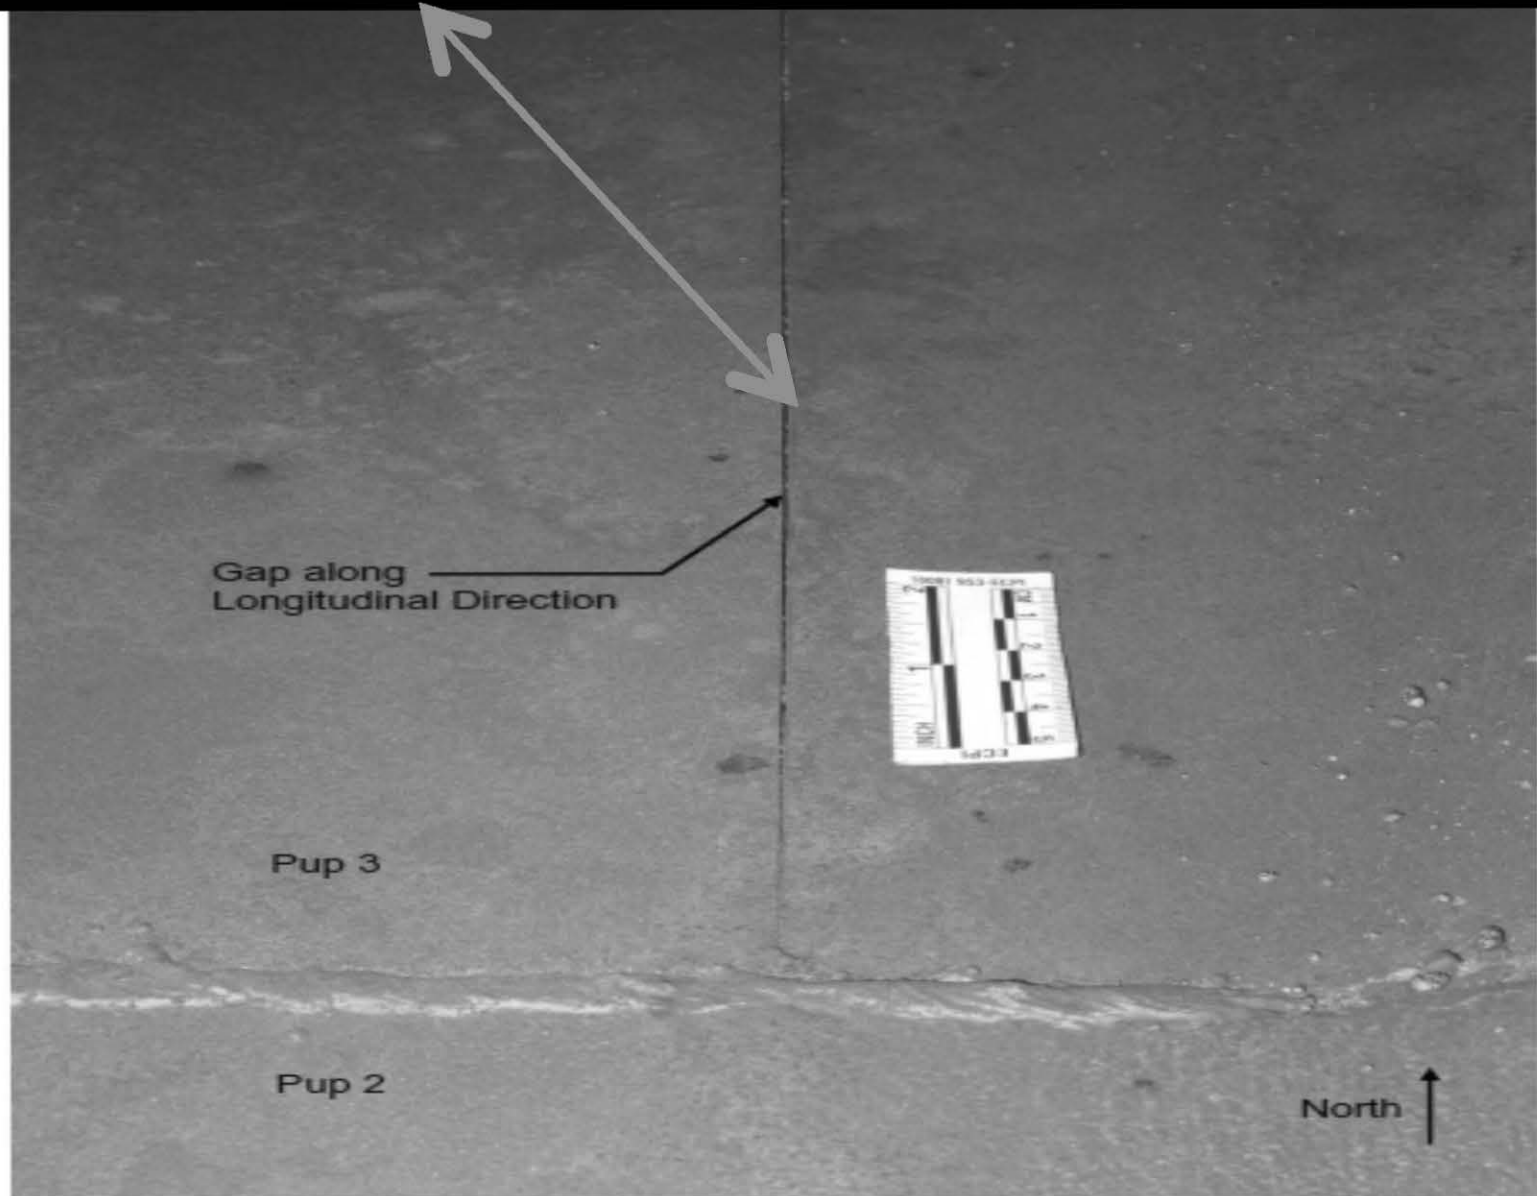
Inside wall of pup 3 showing a longitudinal gap that extended the length of the pup.
